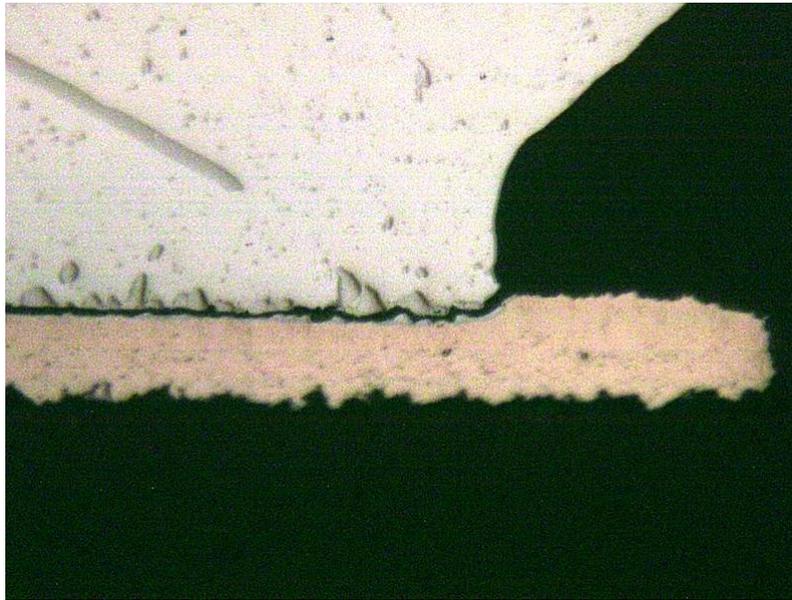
Typical BGA brittle intermetallic fracture with SAC alloy on copper pad.
